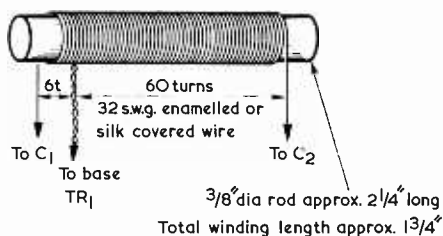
The ferrite rod assembly. Turns are spaced out to give the winding length indicated
